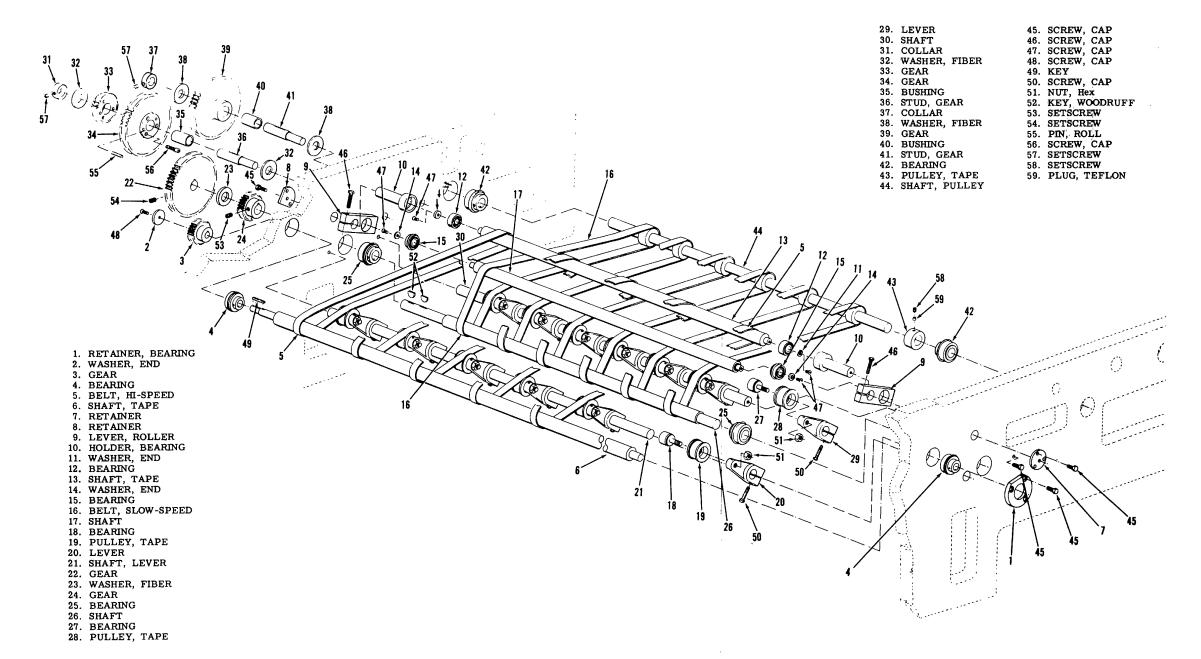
Paper guide, kicker and tape bracket assembly, exploded view.
